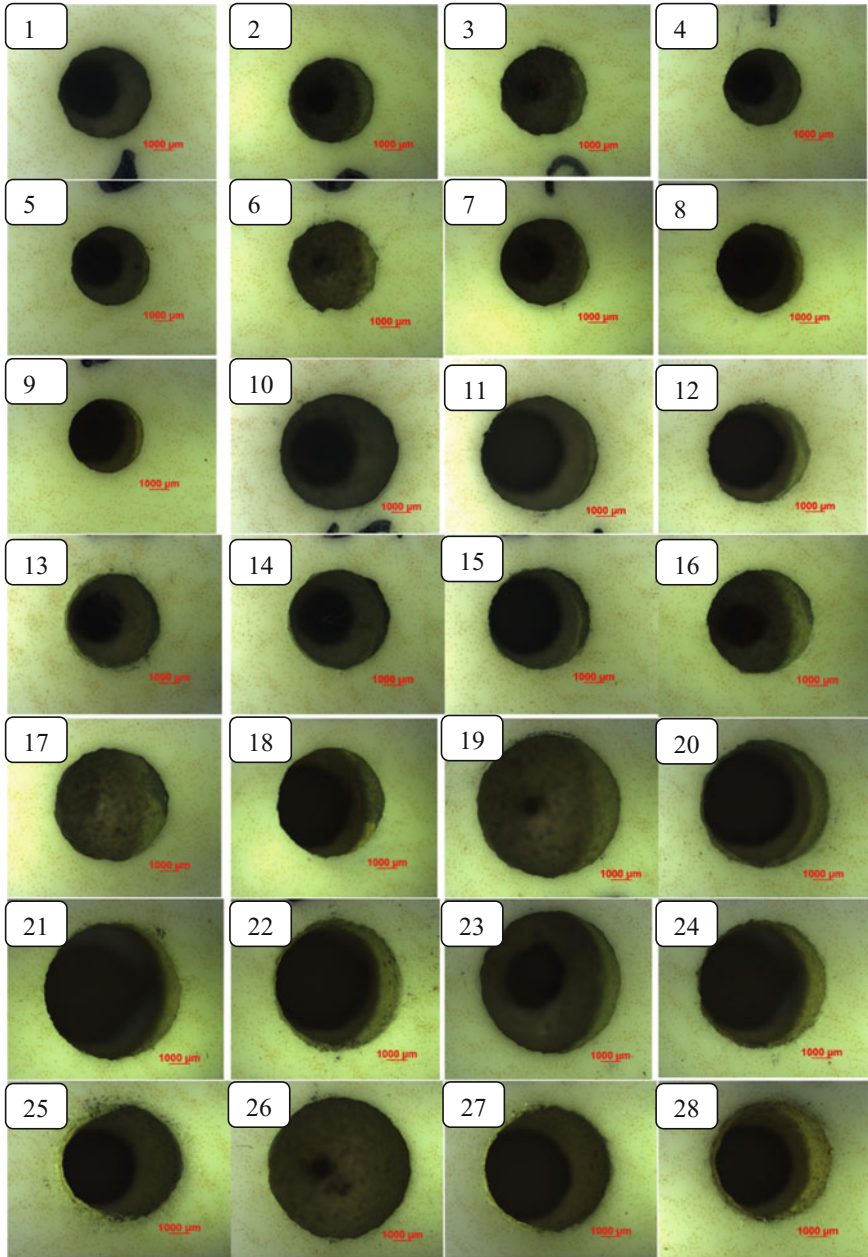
Microscopic views of the machined holes (using SiC) on tiles
